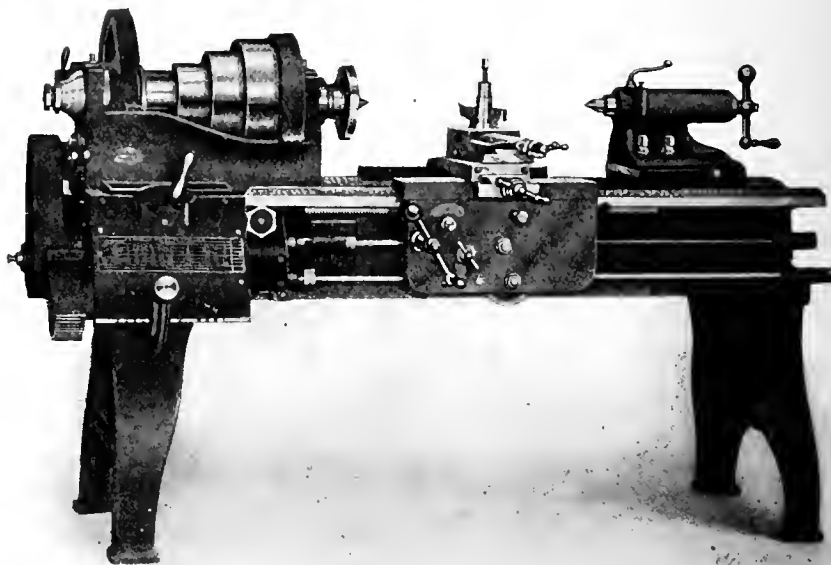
Reed Lathe provided with Quick-change Gear Mechanism
